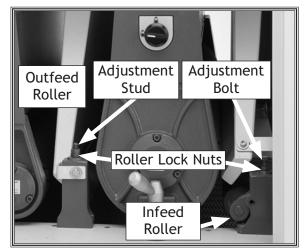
Front sanding drum pressure roller adjustment locations (W1757).
